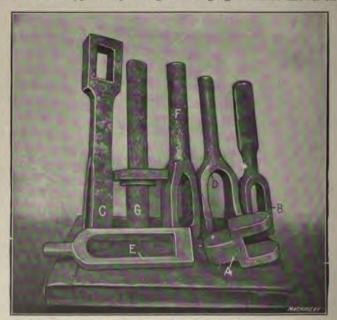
Miscellaneous Examples of Lap-welding and Forming Operations accomplished on a 6-inch Ajax Universal Forging Machine
